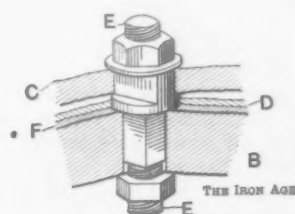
View Showing How the Disk, Fig. 7, is Held.
